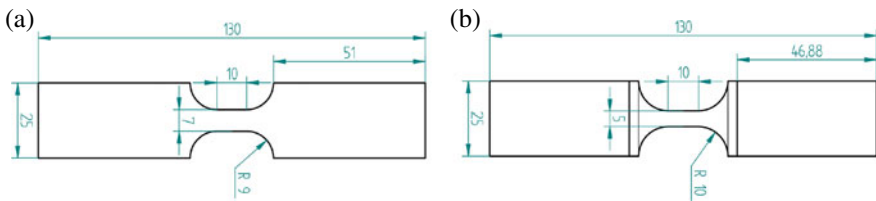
Specimen geometry for fatigue investigations before milling a and after milling b
